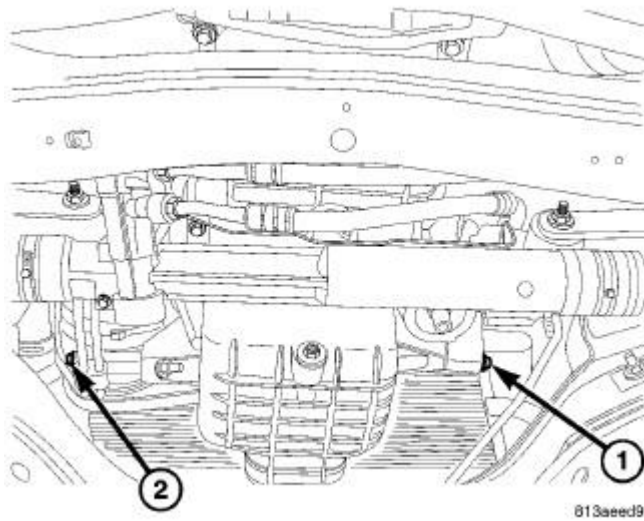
Locating Mounting Bracket & A/C Compressor Bracket Bolts
